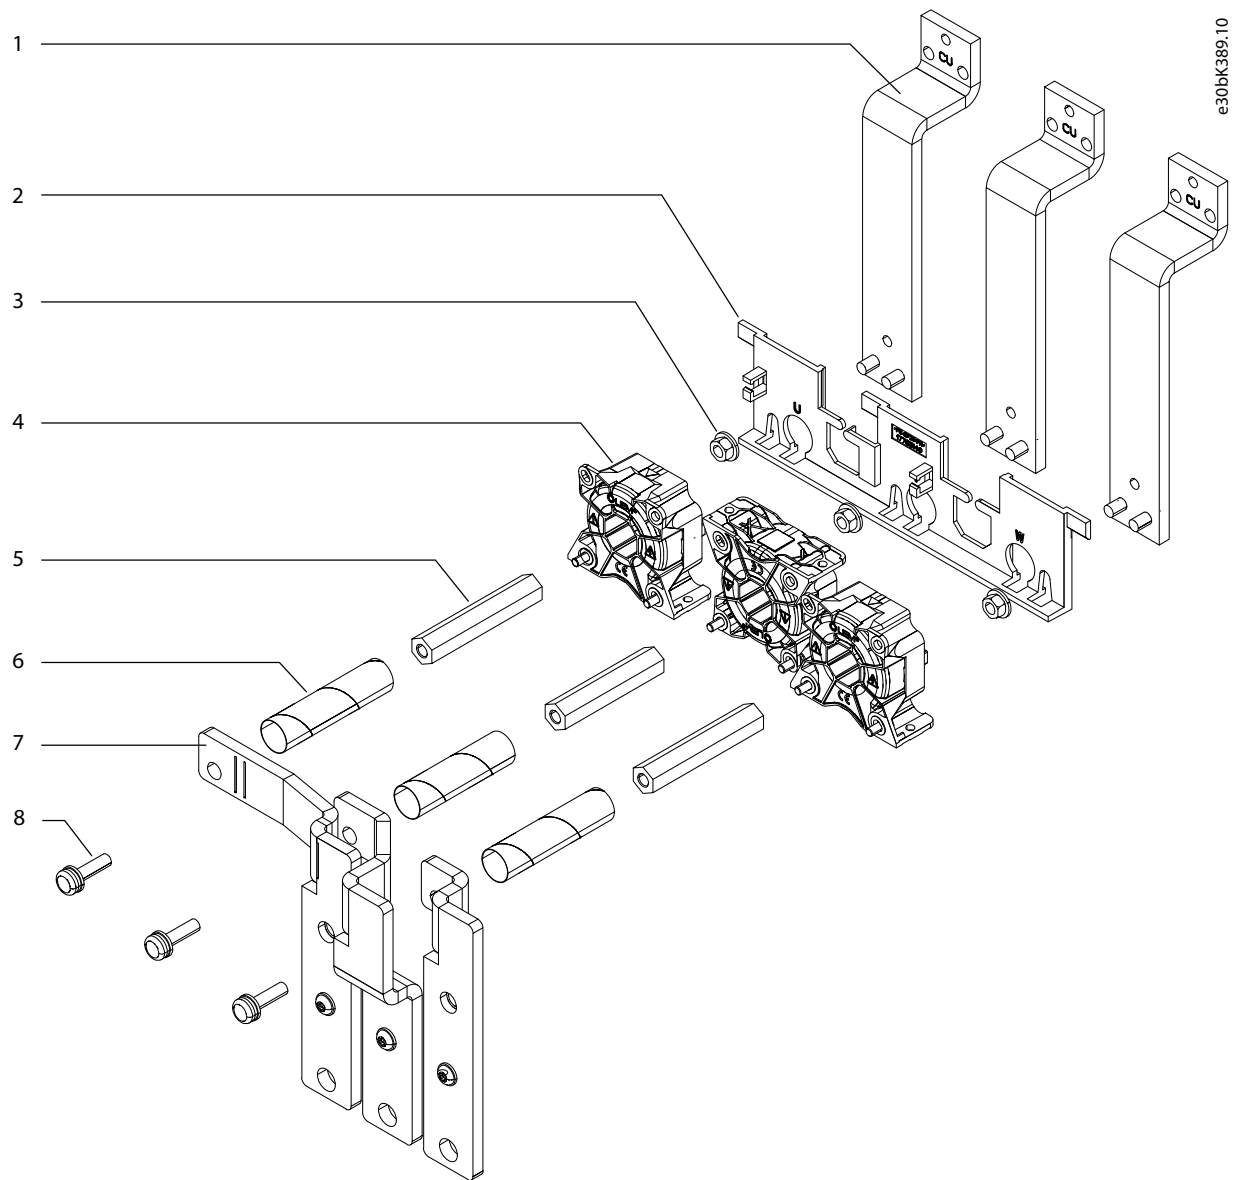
Current Sensor Hex Busbar Assembly (D1h/D3h/D5h/D6h Drives)
